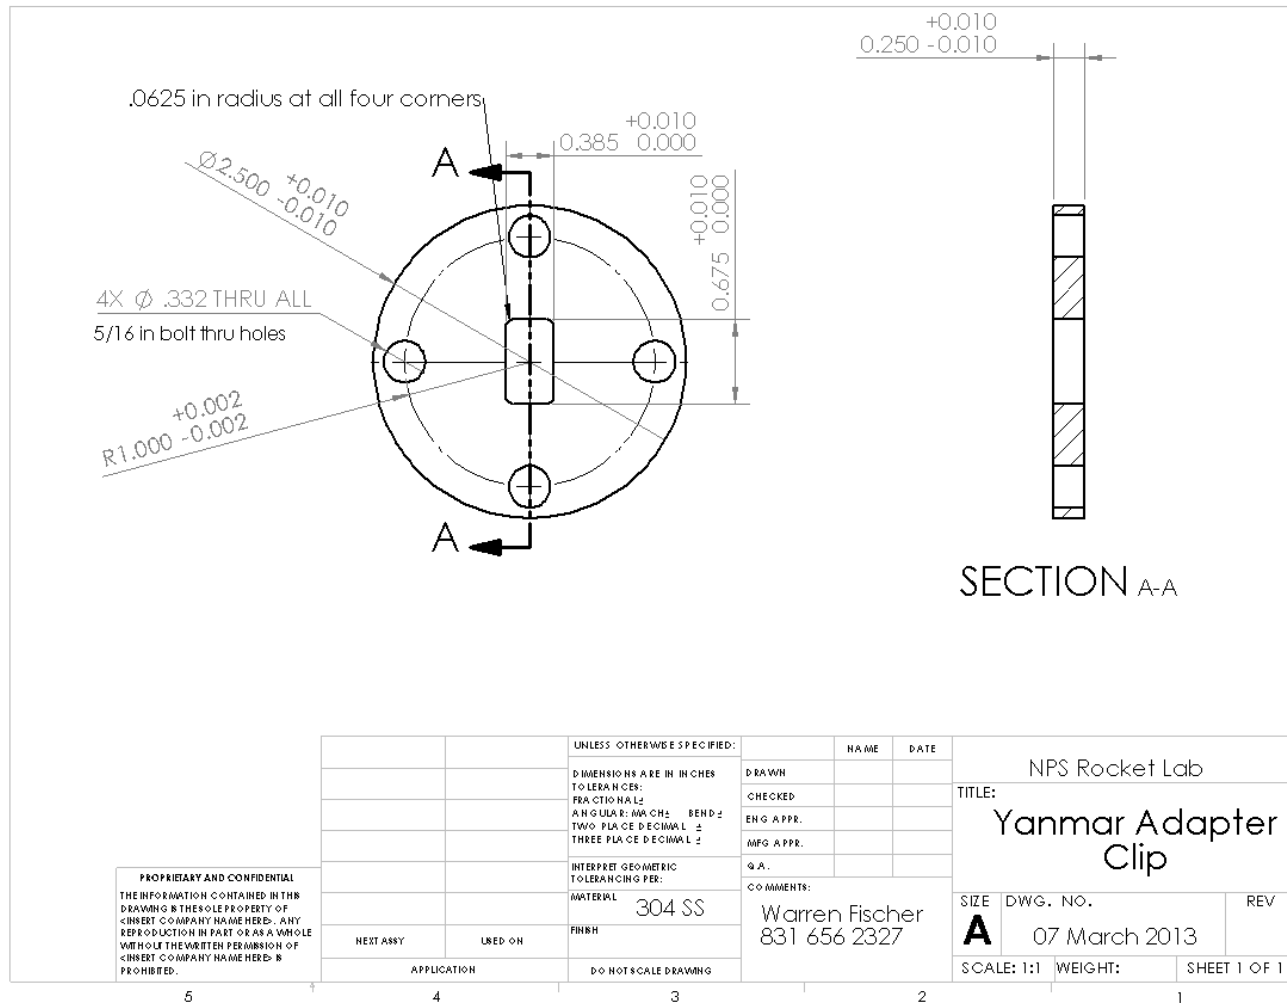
Yanmar Injector Adapter Clip Fabrication Drawing
